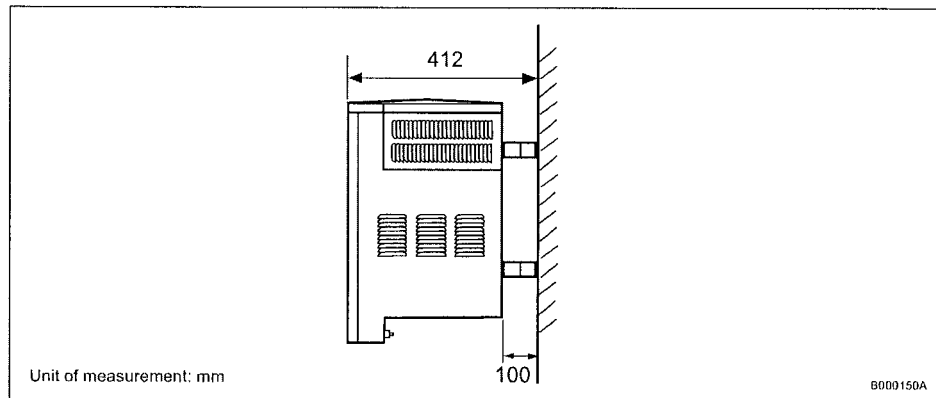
RBS 3518 with the Wall-Mounting Bracket
